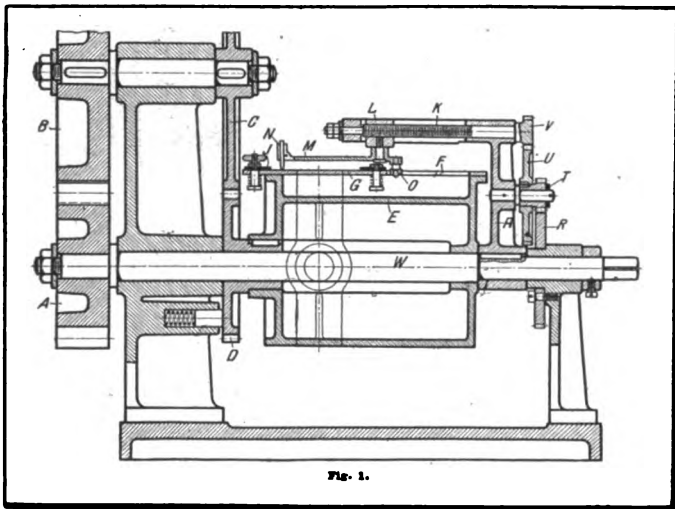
Apparatus designed for testing and charting gear-wheel inaccuracies
